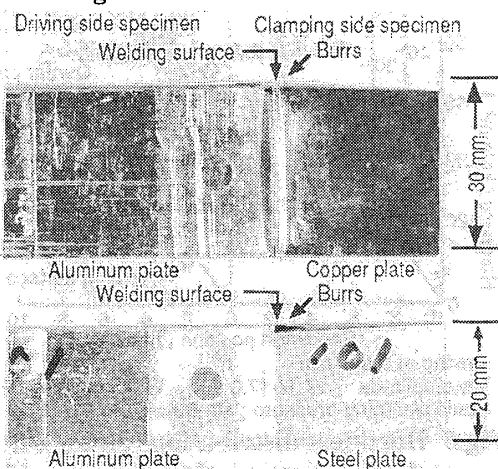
Weld condition of 6 mm thick aluminum, copper and steel plate specimens.
